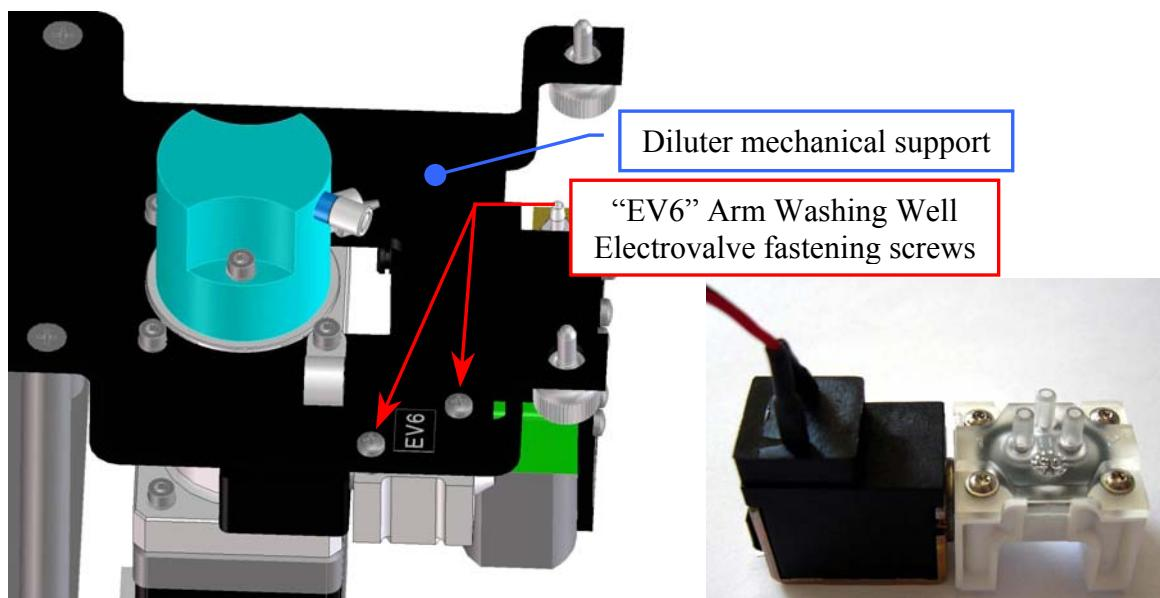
“EV6” Arm Washing Well Electrovalve fastening screws
